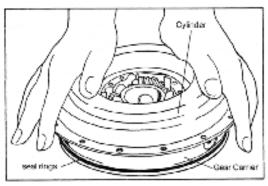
Pressing Cylinder on Bevel Gear Carrier
